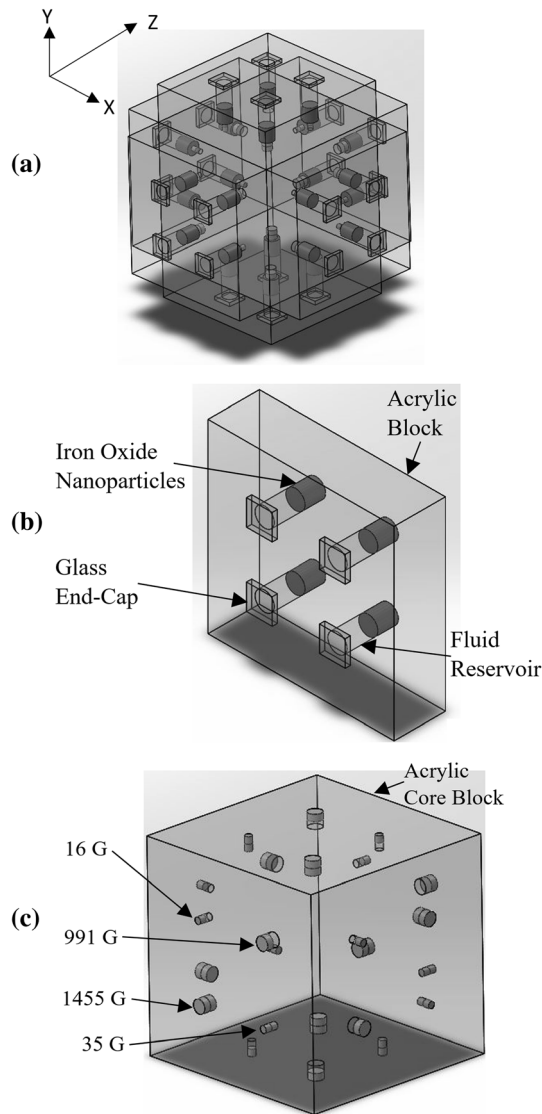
SolidWorks assemblies of the visual iron oxide magnetometer (a), outer acrylic block assembly (b), core acrylic block assembly (c)
